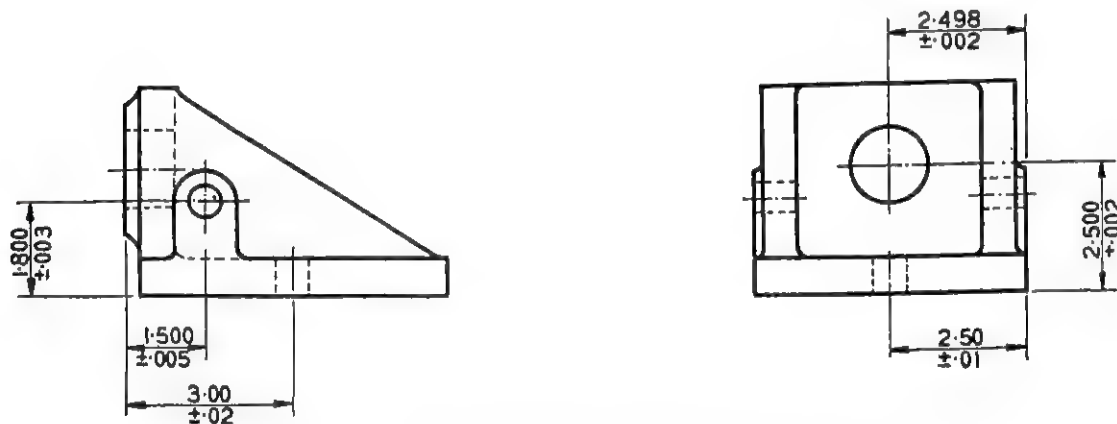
Dimensioning positions by toleranced centre distances
